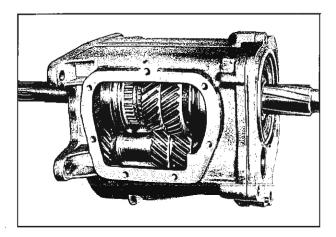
A-17 3-4 Speed Synchronizer Clutch Sleeve in 4th Gear
